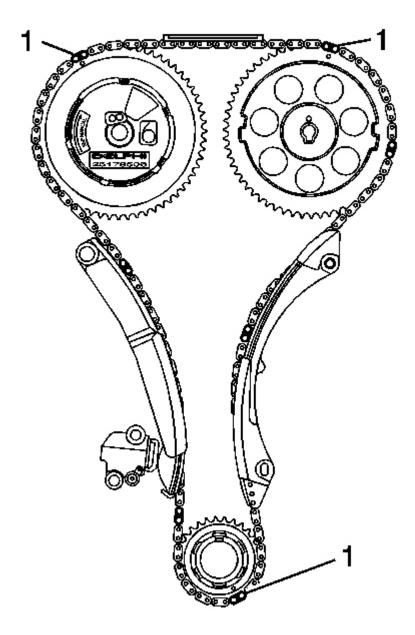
View Of Timing Chain Aligning Marks Courtesy of GENERAL MOTORS CORP.
